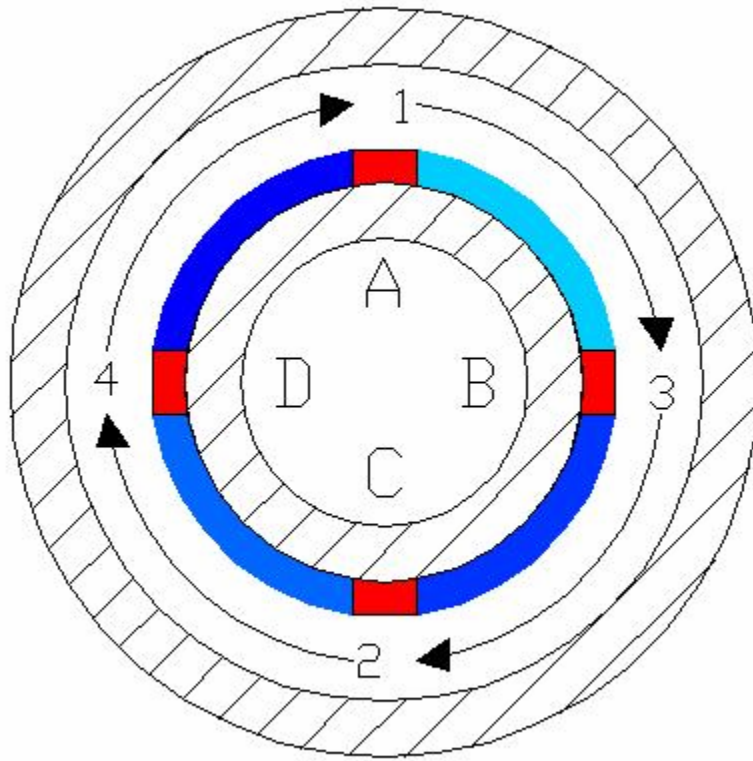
Tack welds and quarter circumferential welding illustration
